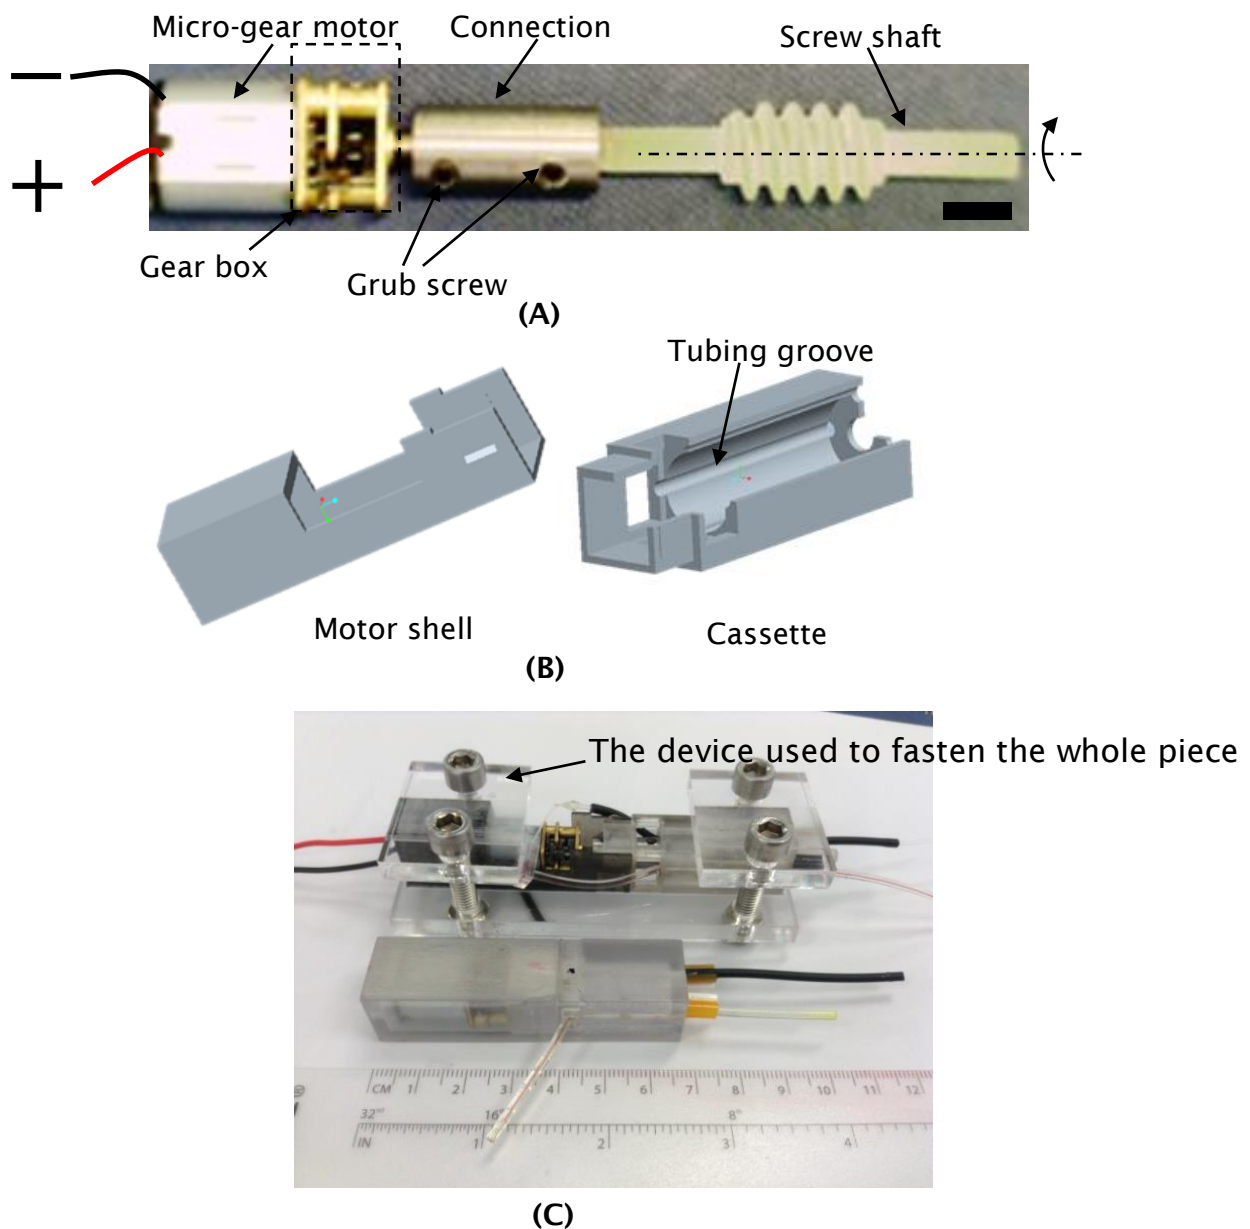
Design and assembly of the miniaturized peristaltic pump. (A) The assembly of screw shaft with micro-gear motor linked by concentric metal tube fixed by two grub screws. Scale bar: 1 cm. (B) The design of motor shell and cassette. (C) The assembly of the pump which was enhanced by a rig. The total dimension was 95 mm × 14 mm × 14 mm.
